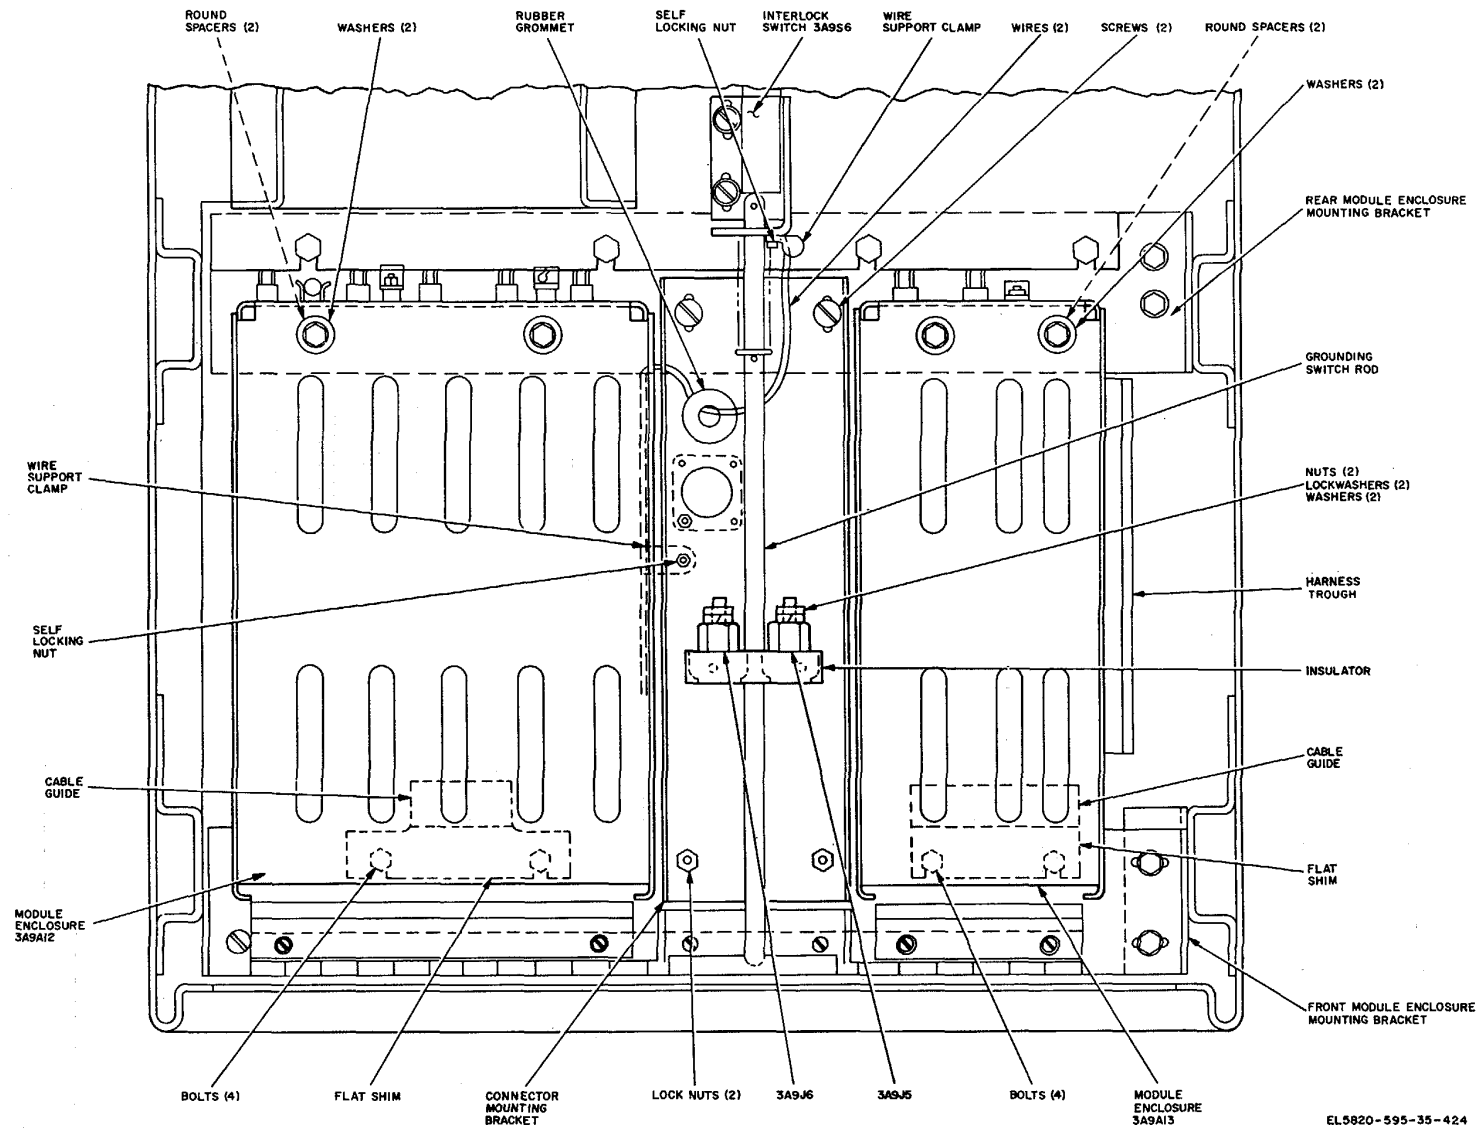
Module enclosures 3A9A12 and 3A9A13 mounted in power amplifier cabinet 3A 9 top view.
